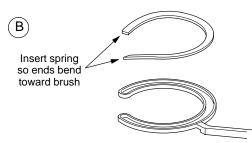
Lifting the Weld Head Brush for Cleaning
